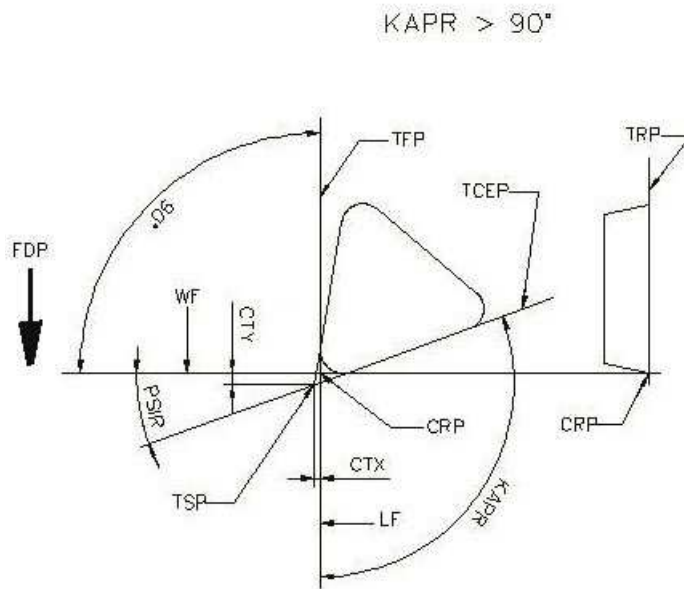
Feed direction perpendicular to tool axis —  $KAPR > 90^\circ$
